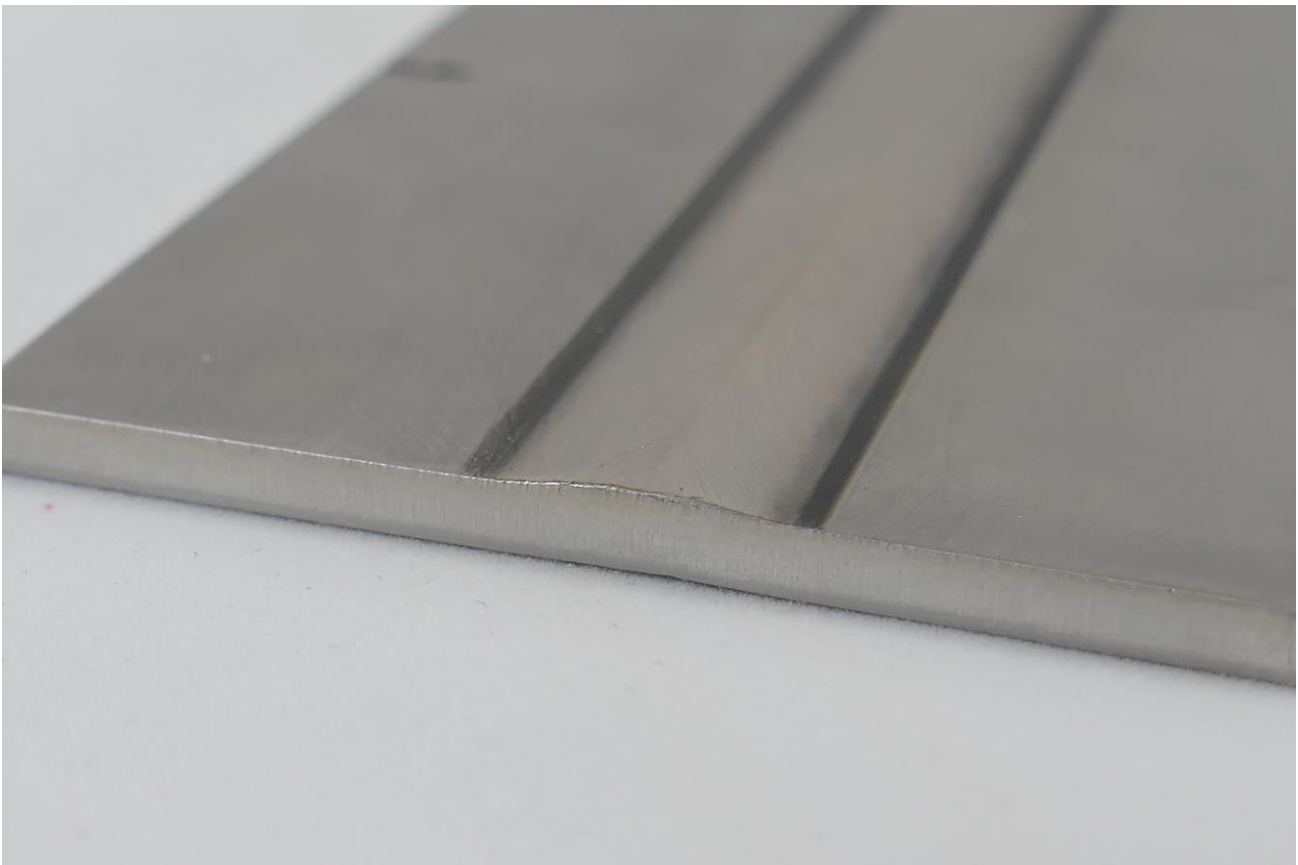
Stainless Steel sheet welded by InFocus $t = 4,0$ mm
